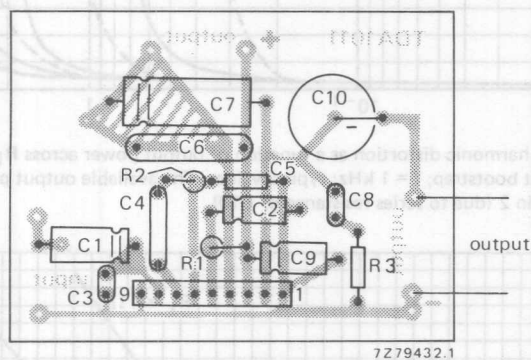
Component side of printed-circuit board showing component layout used for the circuit of Fig. 4.
